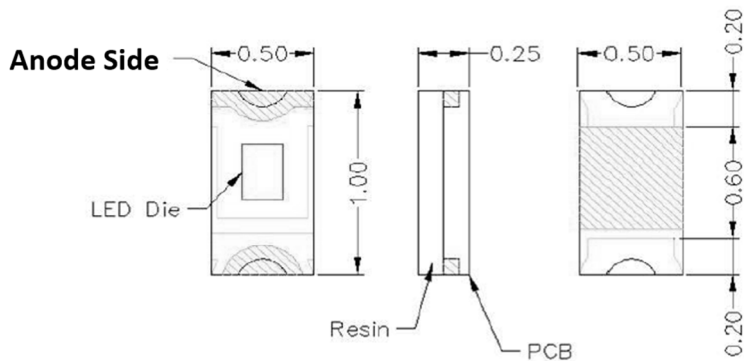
Mechanical drawings of the 1005 package (unit in mm)
